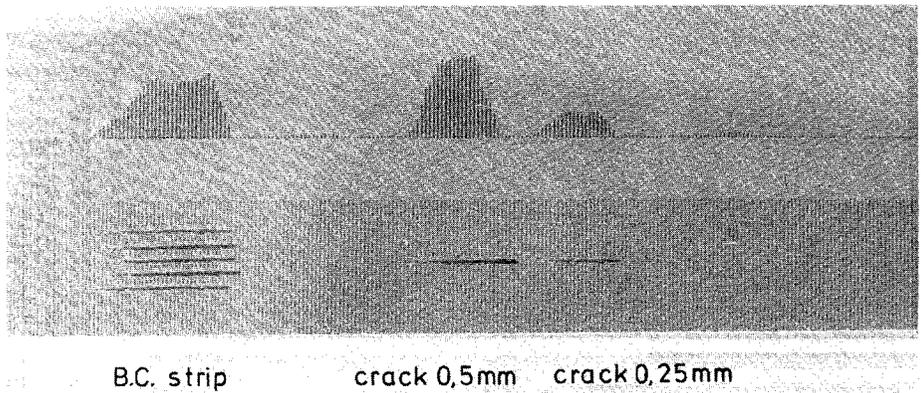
Two-dimensional record of magnetographic inspection (spark-eroded slits in a T-weld).
